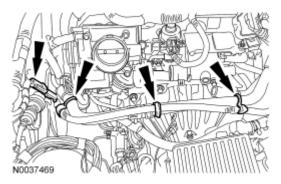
Locating Heater Hose Inline Connector Courtesy of FORD MOTOR CO.
